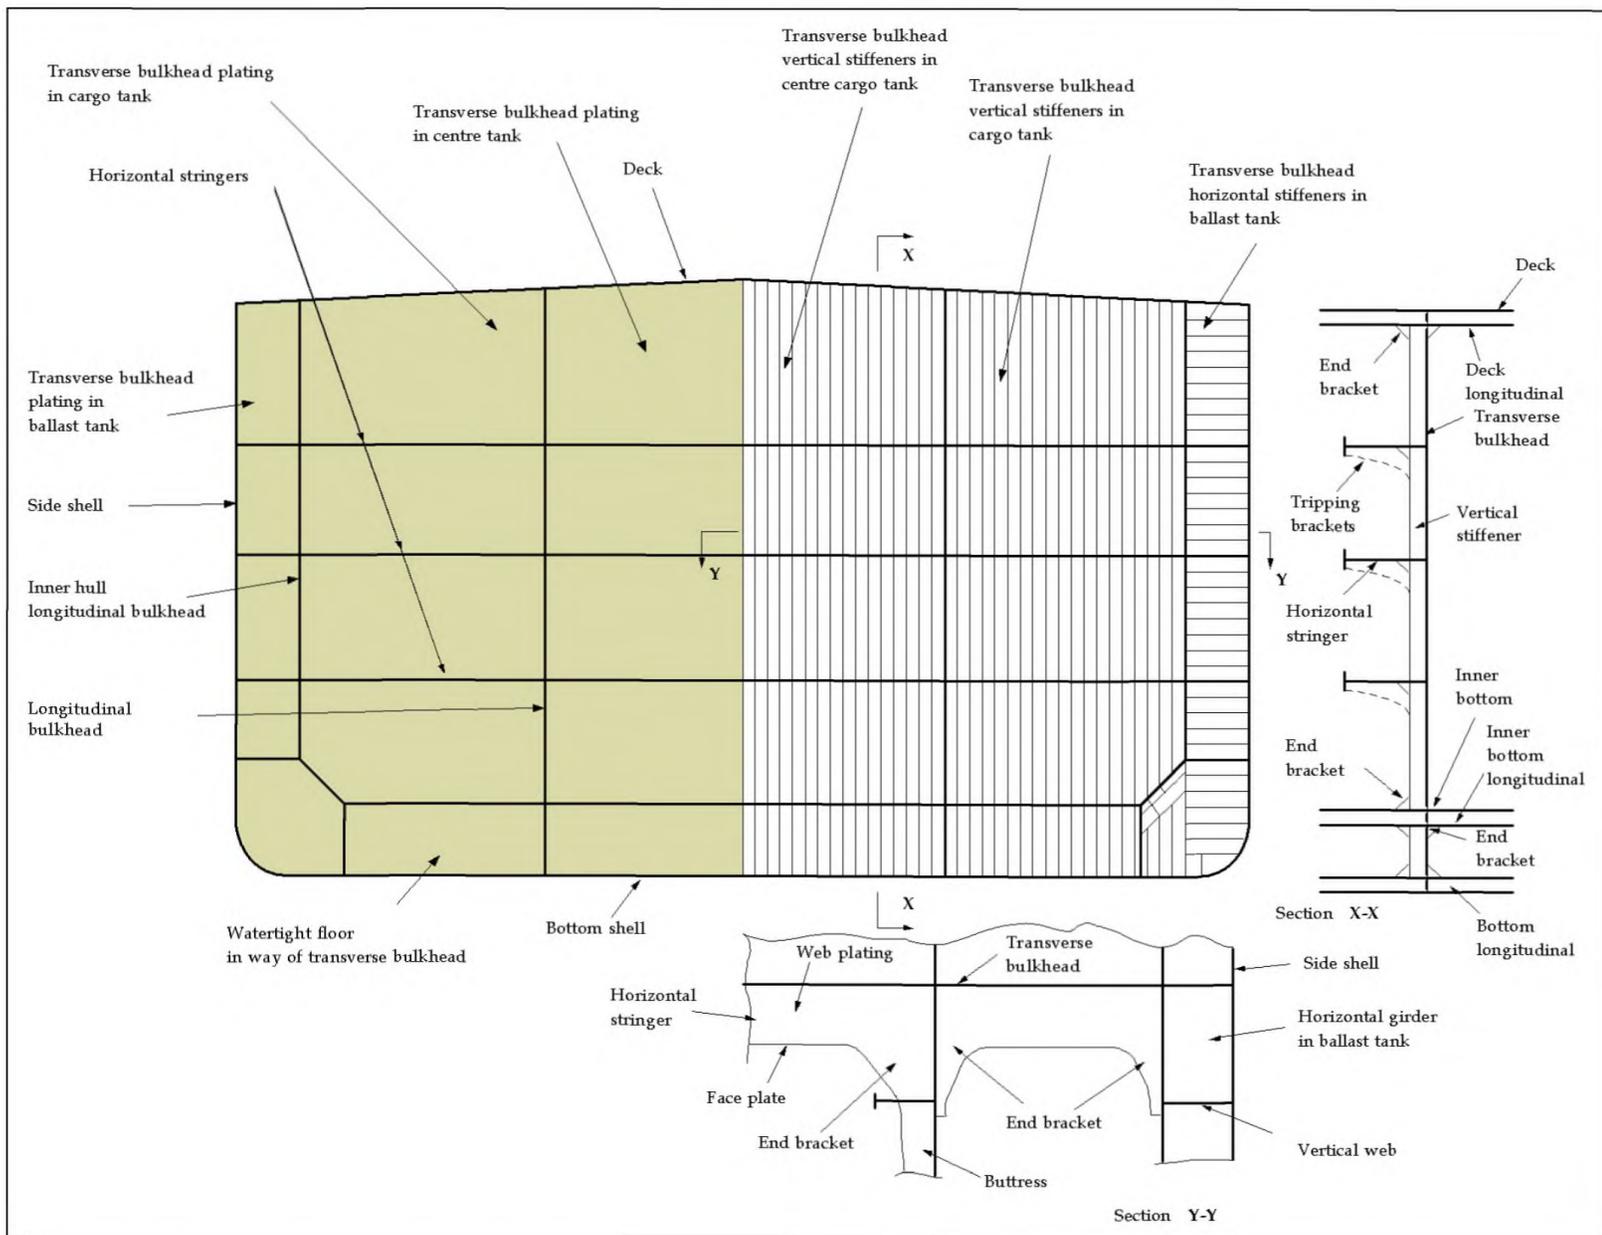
Double Hull Tanker – Typical Transverse Bulkhead
